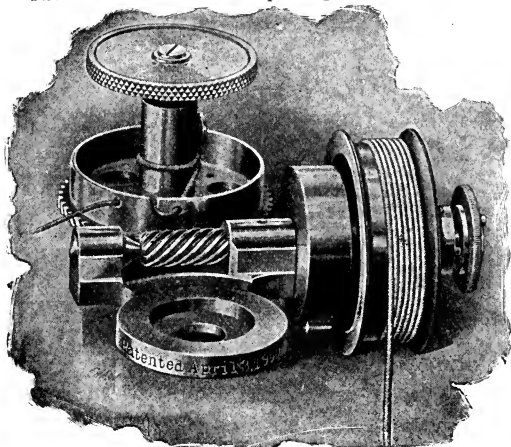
,527.—Ashcroft reducing wheel. *The construction* of this device is similar to that of the Houghtaling reducing motion. The base is extended to provide a support for the worm gear disc to which the cord for the indicator drum is secured. In other respects this device is the same as the Houghtaling gear except that the knurled thumb piece on the worm gear disc corresponds to the knurled thumb piece on the top of the indicator paper drum, when the Houghtaling gear is employed.
